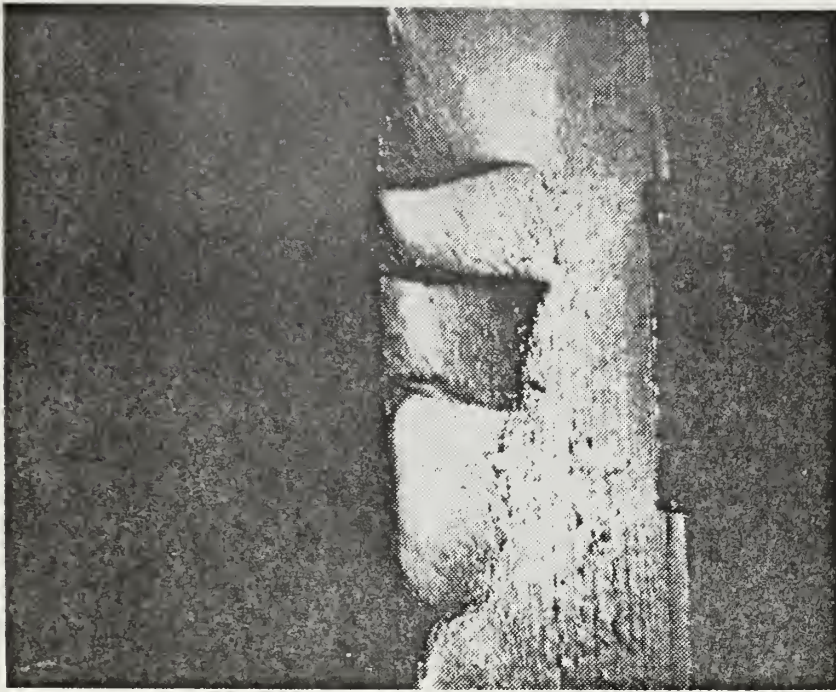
Macro-fractograph of specimen RI-2-2 which was fractured after 36,700 cycles at 100 ksi, showing that fatigue cracks emanate from several sites (left edge) and later join to form one primary crack front (Ratchet marks). Also, fatigue striations occupy the entire area of fast fracture. X10.
